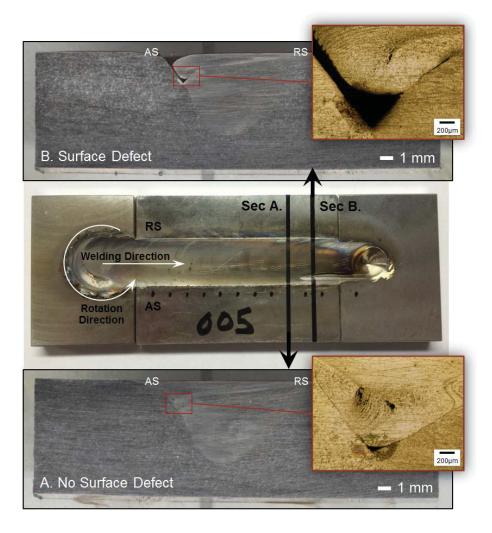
Macro Defect Analysis of a Friction Stir Welded Stainless Steel Specimen from Cubicle Start-Up Testing: Cross-Section A. Consolidated Surface Region, Cross-Section B. Surface Defect Region
